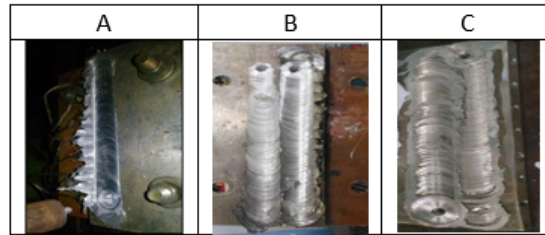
Visual FSW Welding Results (A) length of pin probe 11.0 mm, (B) length of pin probe 11.5 mm, (C) length of pin probe 12.0 mm
